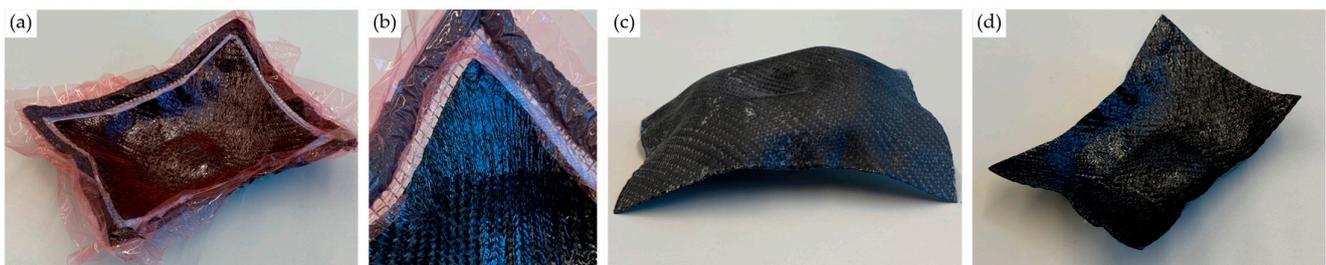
(a) Layup with organo sheet in vacuum bag after forming. (b) Detailed view on a corner of the part with visible shear and wrinkles. (c) Doubly curved carbon-fiber-reinforced part after removal from the vacuum bag (upper side) and (d) (lower side).
